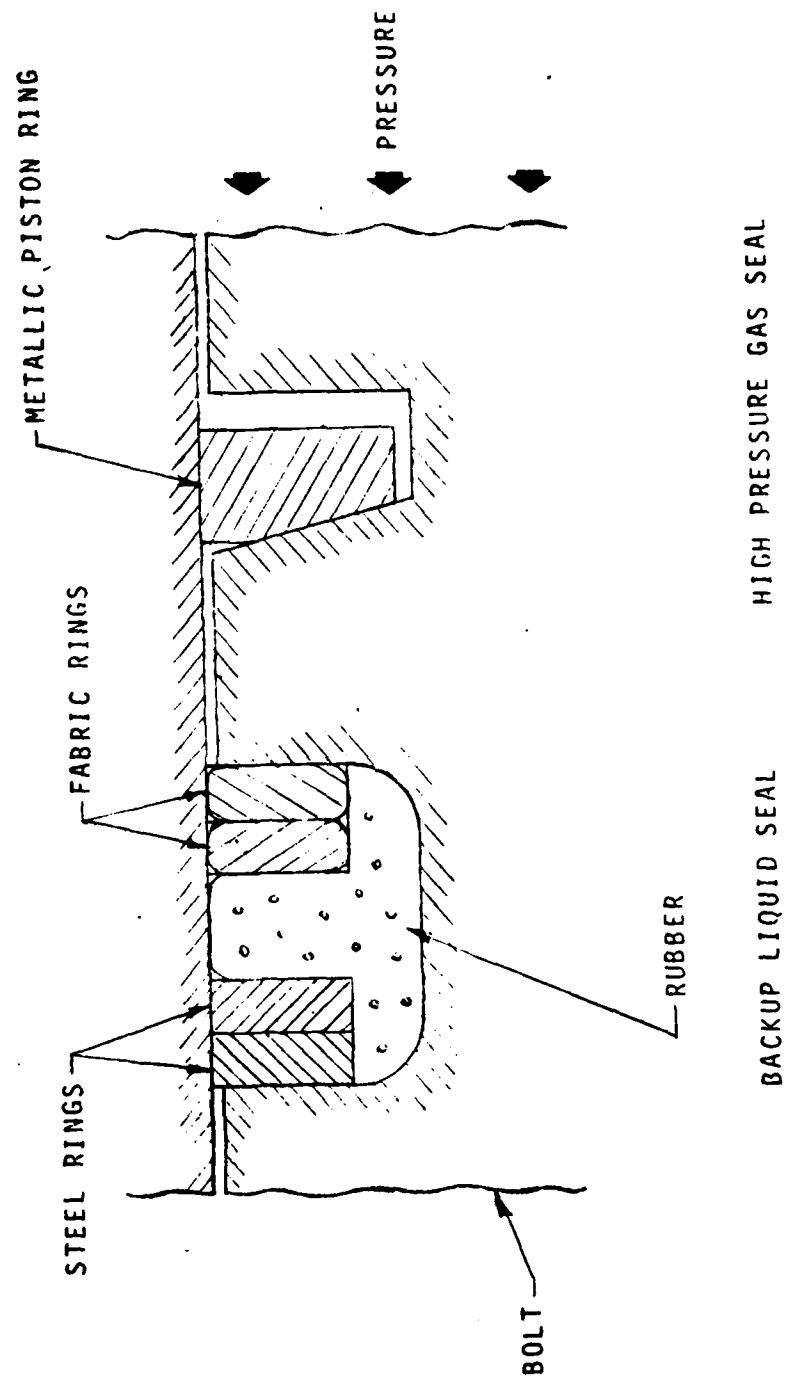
Ring with Bevelled Back-Step Piston Ring
